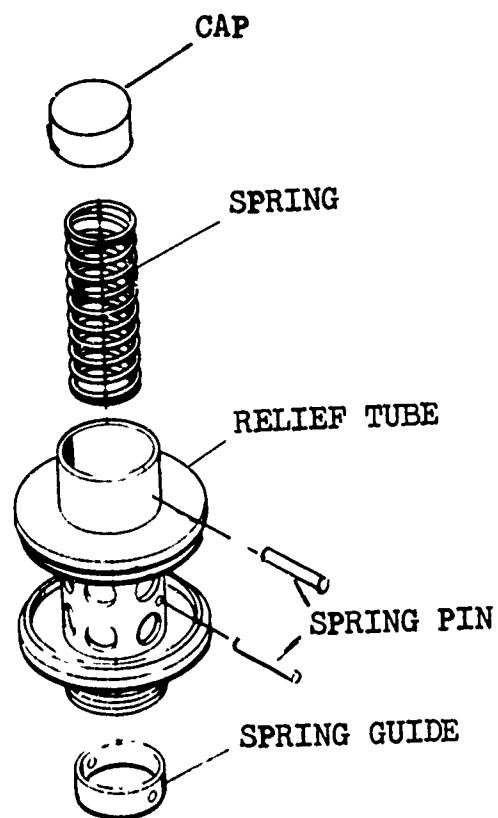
Filter Relief Valve Assembly (exploded view)
